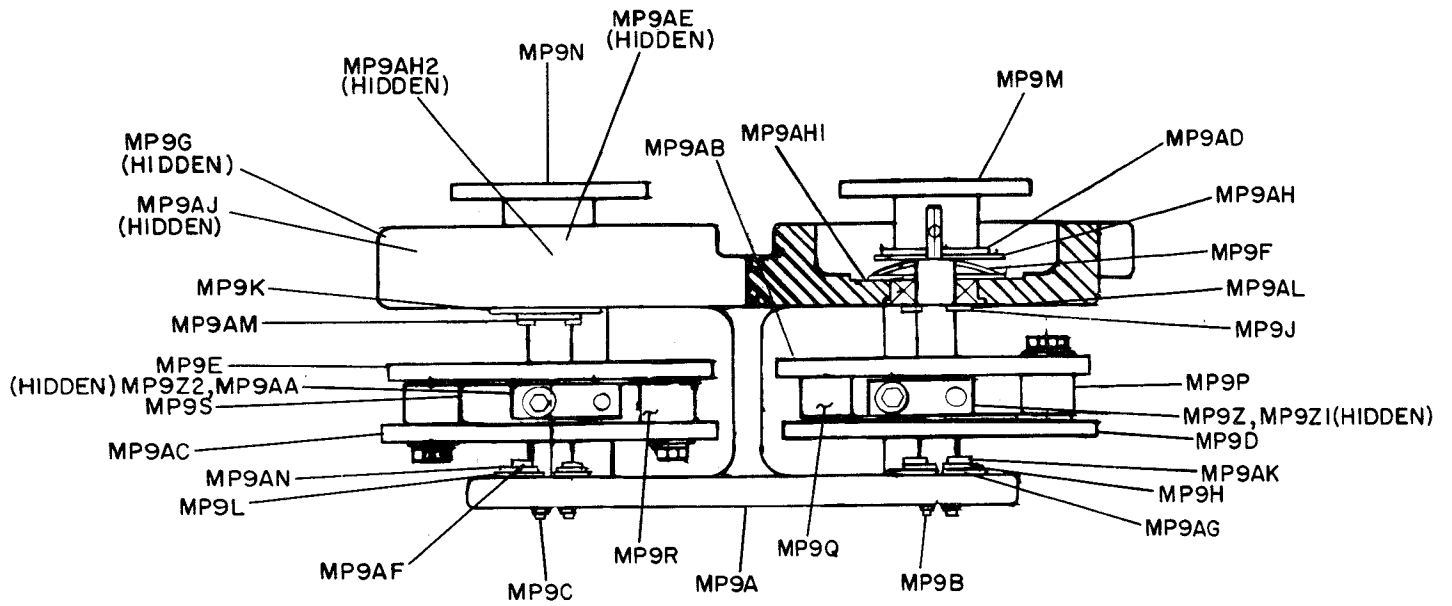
Dual-Sprocket Assembly A2MP9, Component Locations
